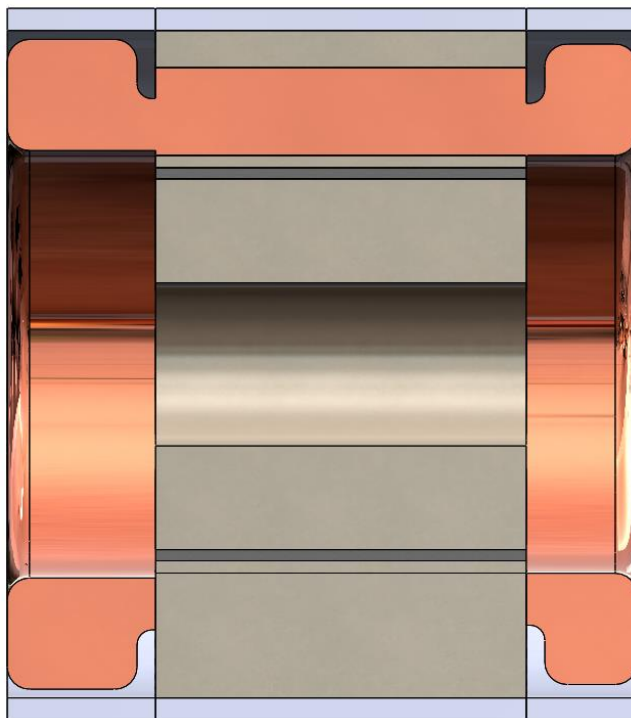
In-wheel motor CAD surrounded by the 3mm thick aluminium case.
